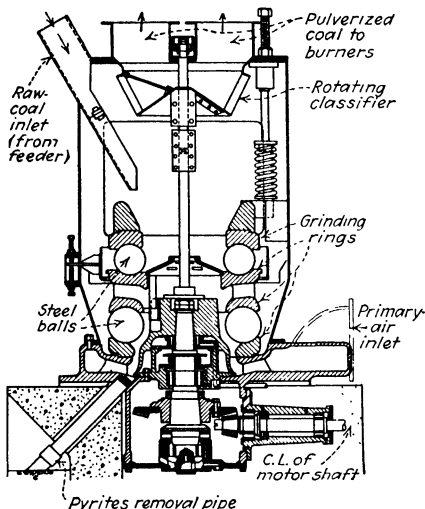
Ball and grinding-ring type of pulverizer. (Babcock and Wilcox Company.)
